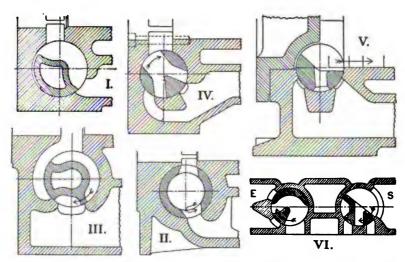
Various Exhaust-valves: I. Plain Single-ported Valve; II. Fleming Valve; III. Murray Valve; IV. Reynolds Valve; V. Brown Valve; VI. Valves in Head, Cylinder in Fig. 268.
